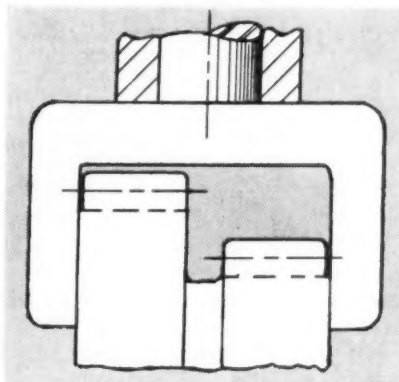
A shifting shoe which is similar in design to the shoe shown in Fig. 29 is illustrated in this sketch, spanning two gears.
